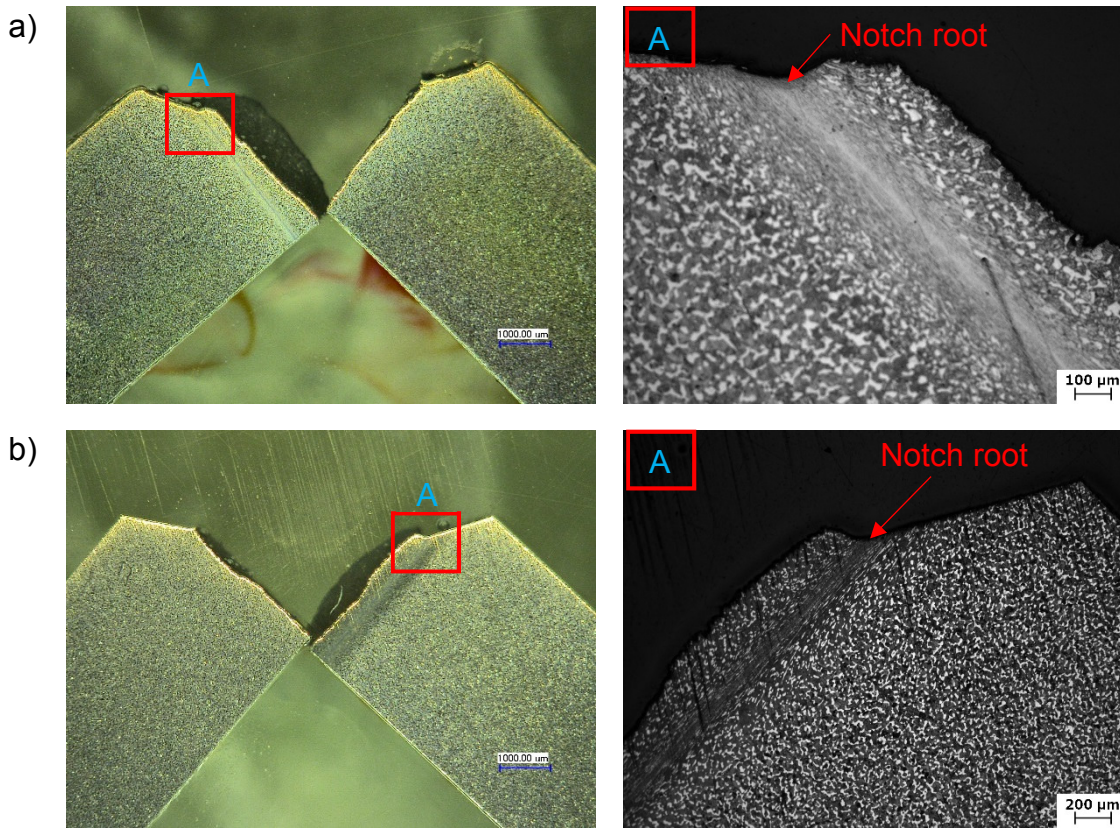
Cross-sectional view of the fractured samples after impact test a) AW and b) PWHT.
